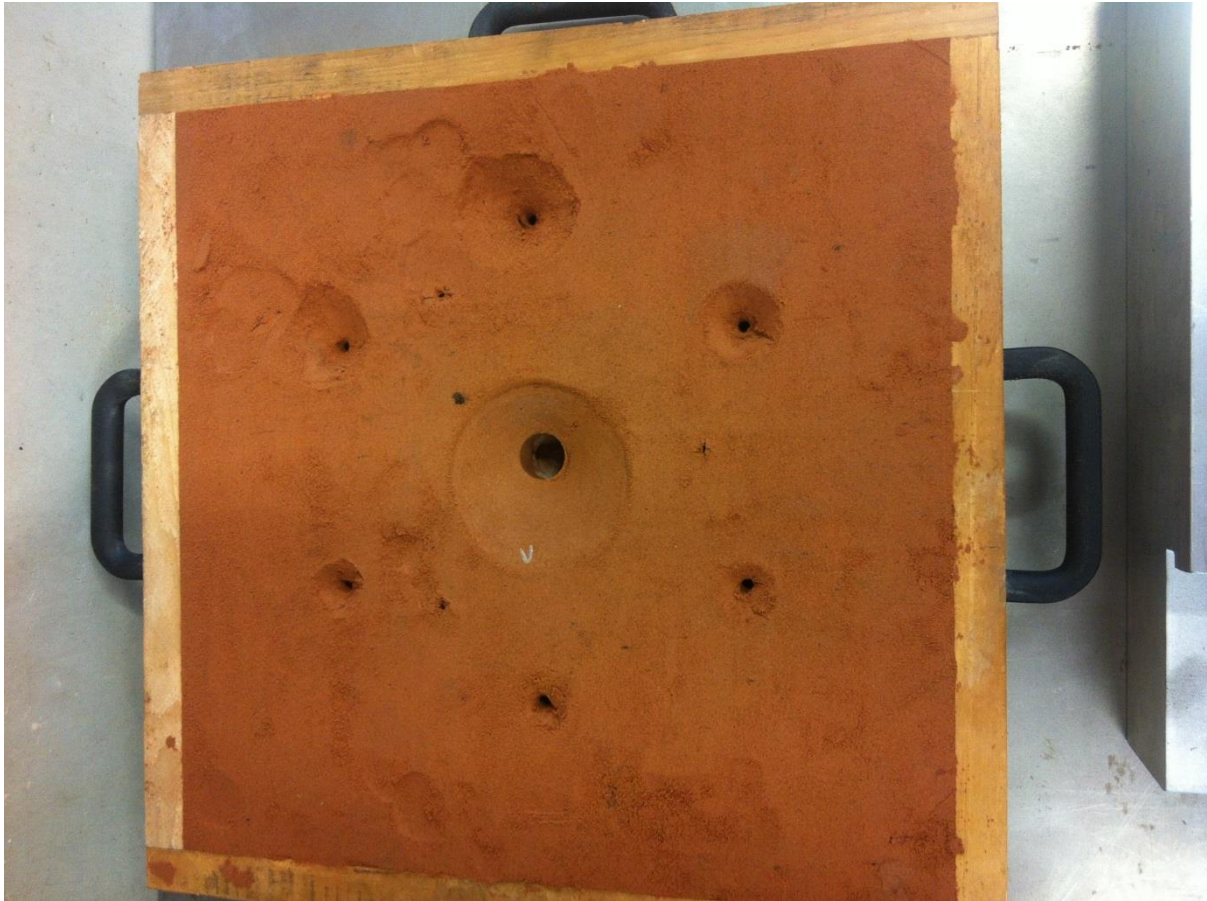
Plan View of Sand Casting Mould Ready for Pouring with Large Pouring Cup and Hand Made Risers
